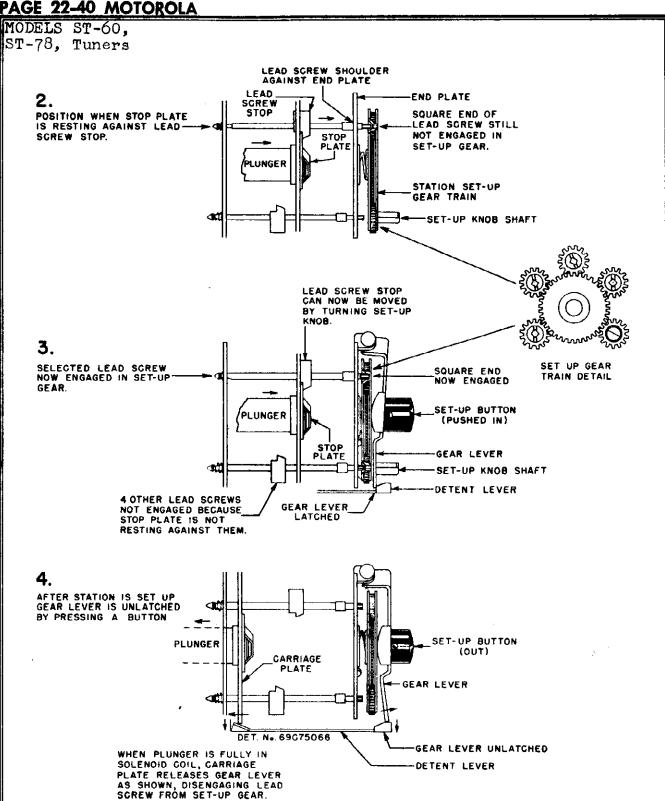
STATION SET-UP MECHANISM TO REMOVE TUNER FROM CHASSIS
